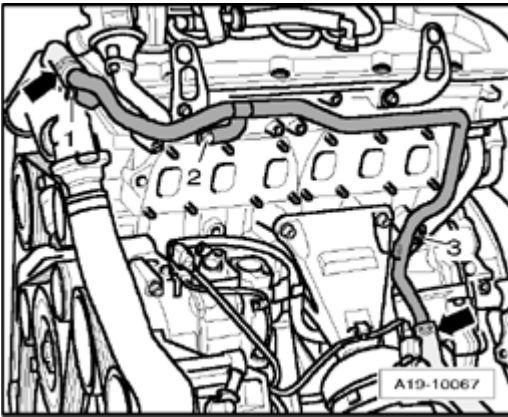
Coolant Hoses At Upper Left Coolant Pipe & Bolts
